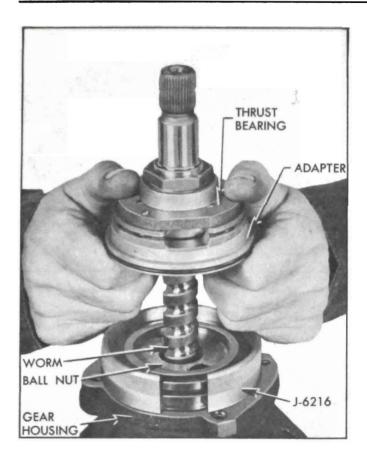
Installing Rack-Piston Assembly into Gear Housing
